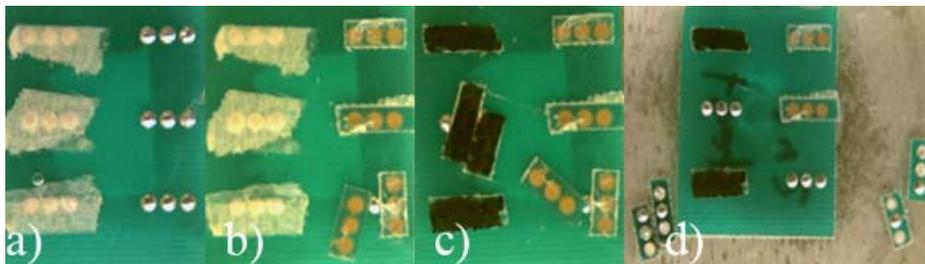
a) Initial substrate with solder, three binding sites masked, b) bare parts assembled with error, c) black parts assembled with error, d) after more intense agitation; incorrectly assembled parts are removed from substrate
